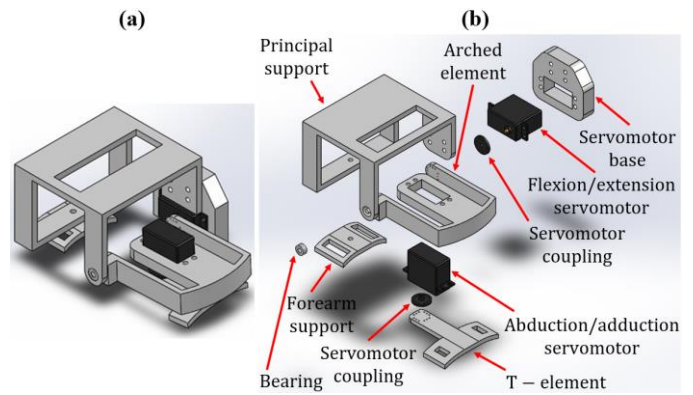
Wrist rehabilitation exoskeleton in SolidWorks: (a) isometric and (b) exploded view.
